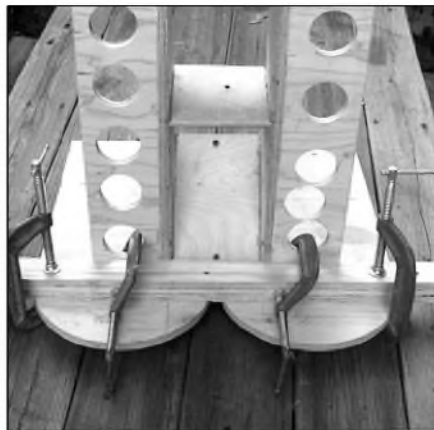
Attaching throat horn assembly to cabinet top/bottom.
